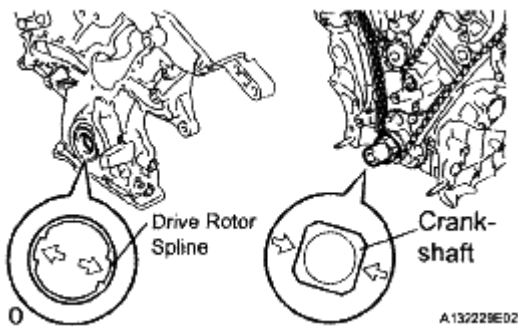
Aligning Oil Pump Drive Rotor Spline & Crankshaft
